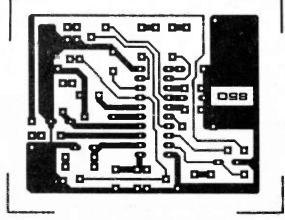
Printed circuit board component layout and underside copper foil master pattern for the Tone Control only board. This board is used with the 10+10W Amplifier (next month).
